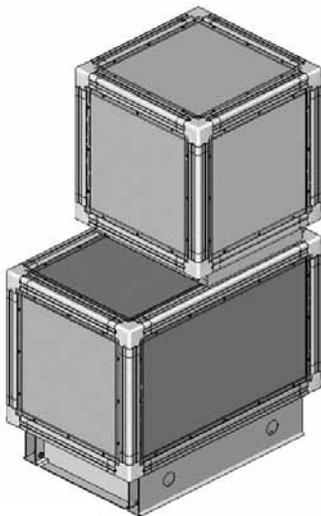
Fixing profile, width direction, unit with intermediate base frame
